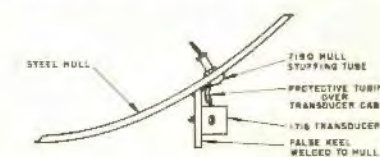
Transducer of Fig. 6 mounted on a false keel plate.
